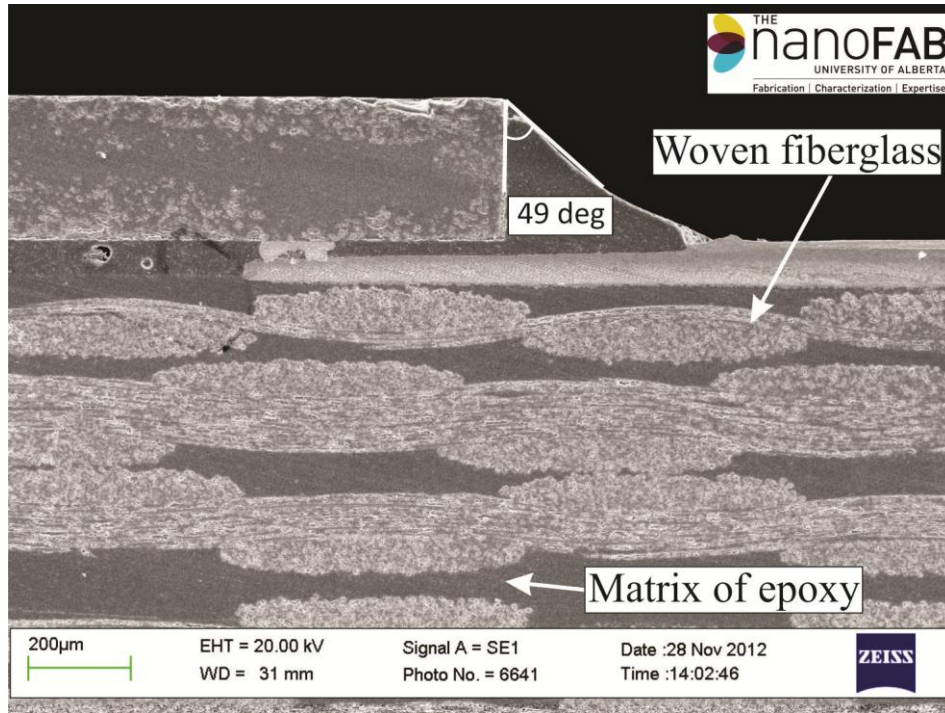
SEM image of the PCB/Chip cross-section showing a different angle for the spew fillet and structure of the PCB composite
